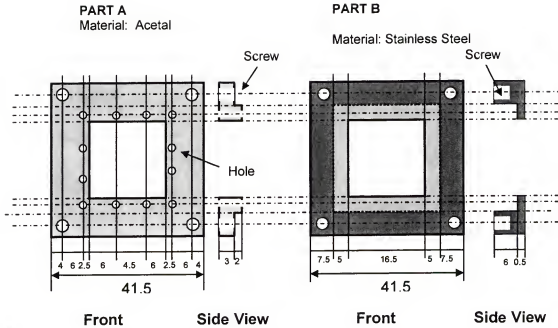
Drawing of EL device holder. In each hole of part A, receptacles (Interconnect Devices, Inc.; Part Number 300106-000-5000, Description: R-SS-100-WW .420) and gold contact pins (Interconnect Devices, Inc.; Part Number 100165-003-952, Description: GSS-3-3.8-G S/C W/Hole) were used.
